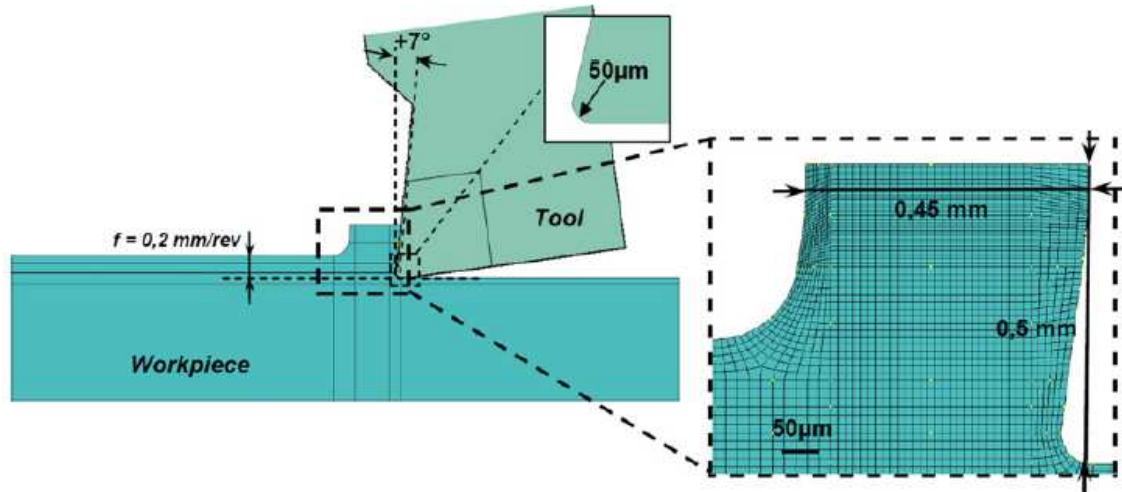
Geometry of the work piece and cutting tool (Courbon et al., 2009).
